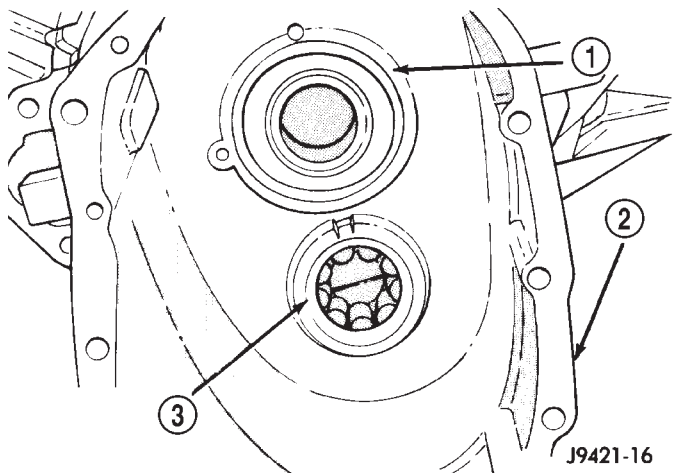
INPUT AND COUNTERSHAFT BEARING RACE
